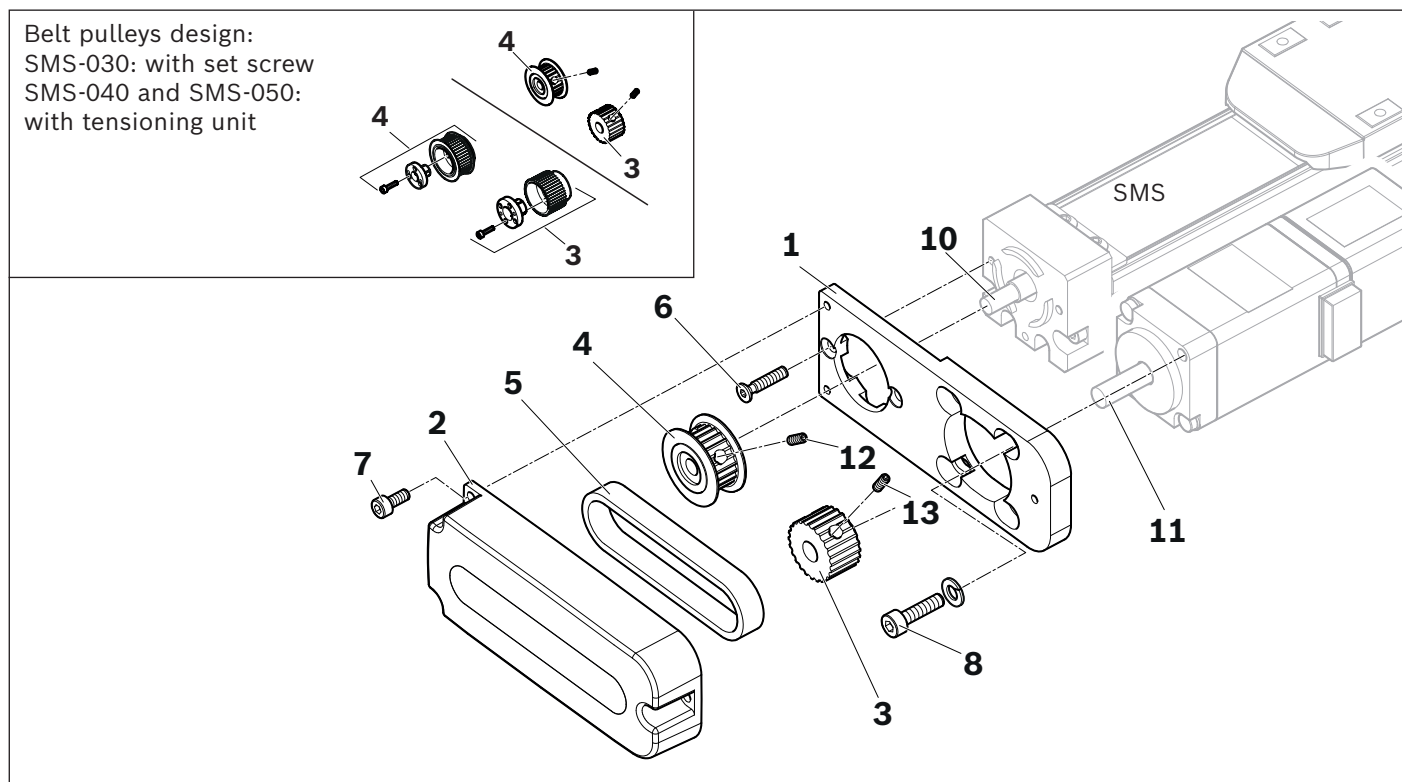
Mounting the SMS-030 – SMS-050 belt side drive
